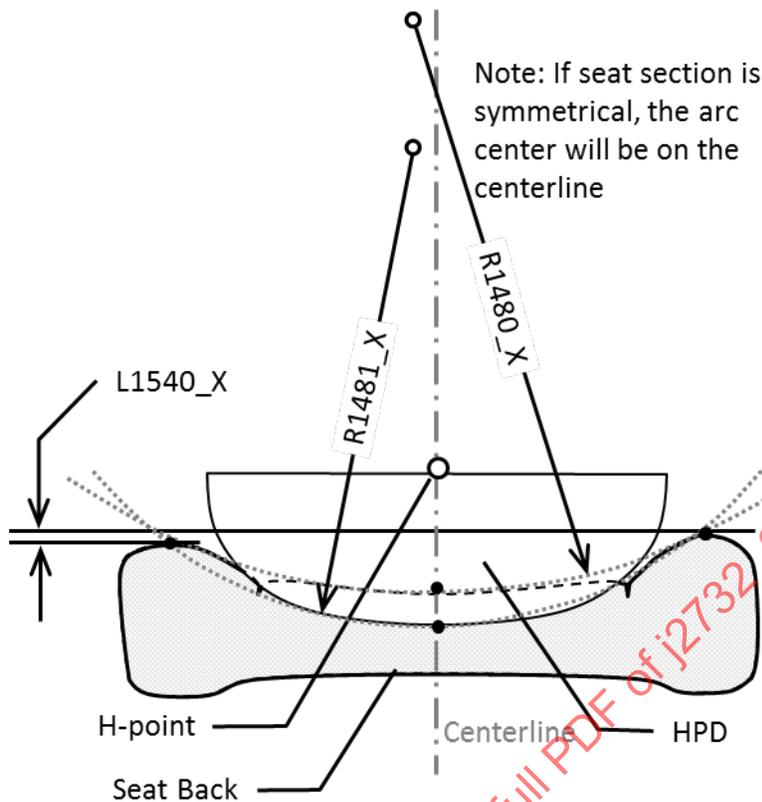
D - Seat back lateral cross-section - bolster asymmetry and radial dimensions
